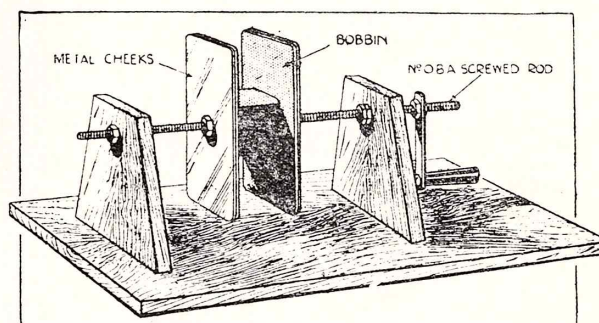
Lay-out of the coil winder mentioned in the text. Metal end plates are required to hold the bobbin and prevent bulging.
